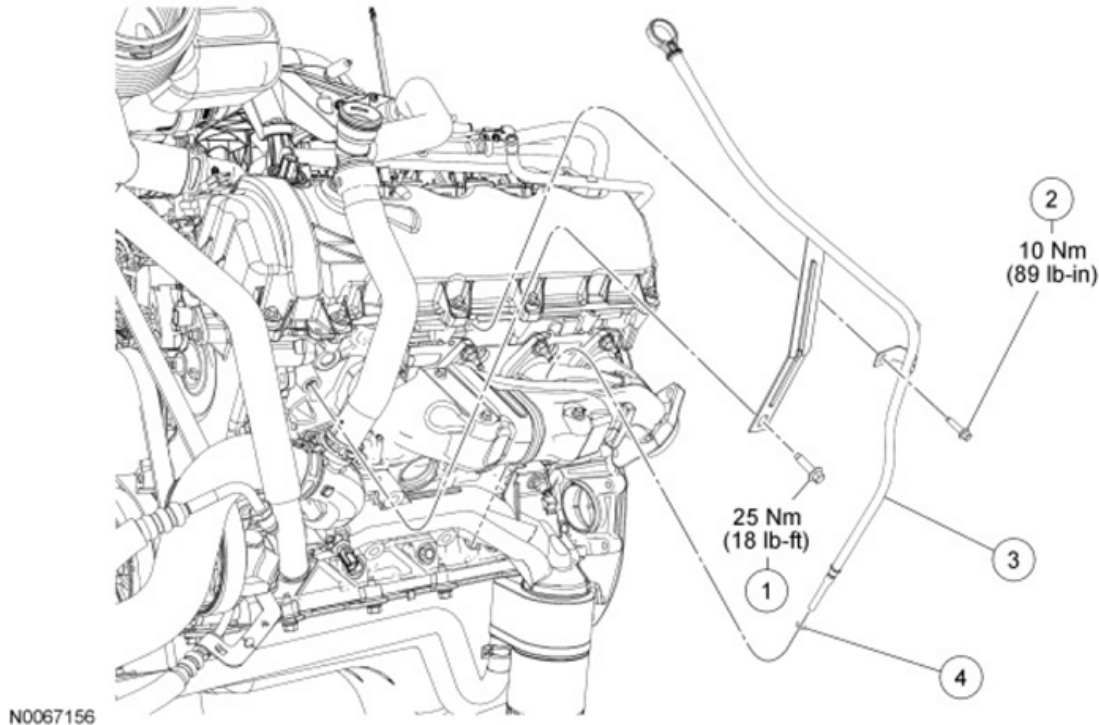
Identifying Oil Level Indicator And Tube With Torque Specifications
